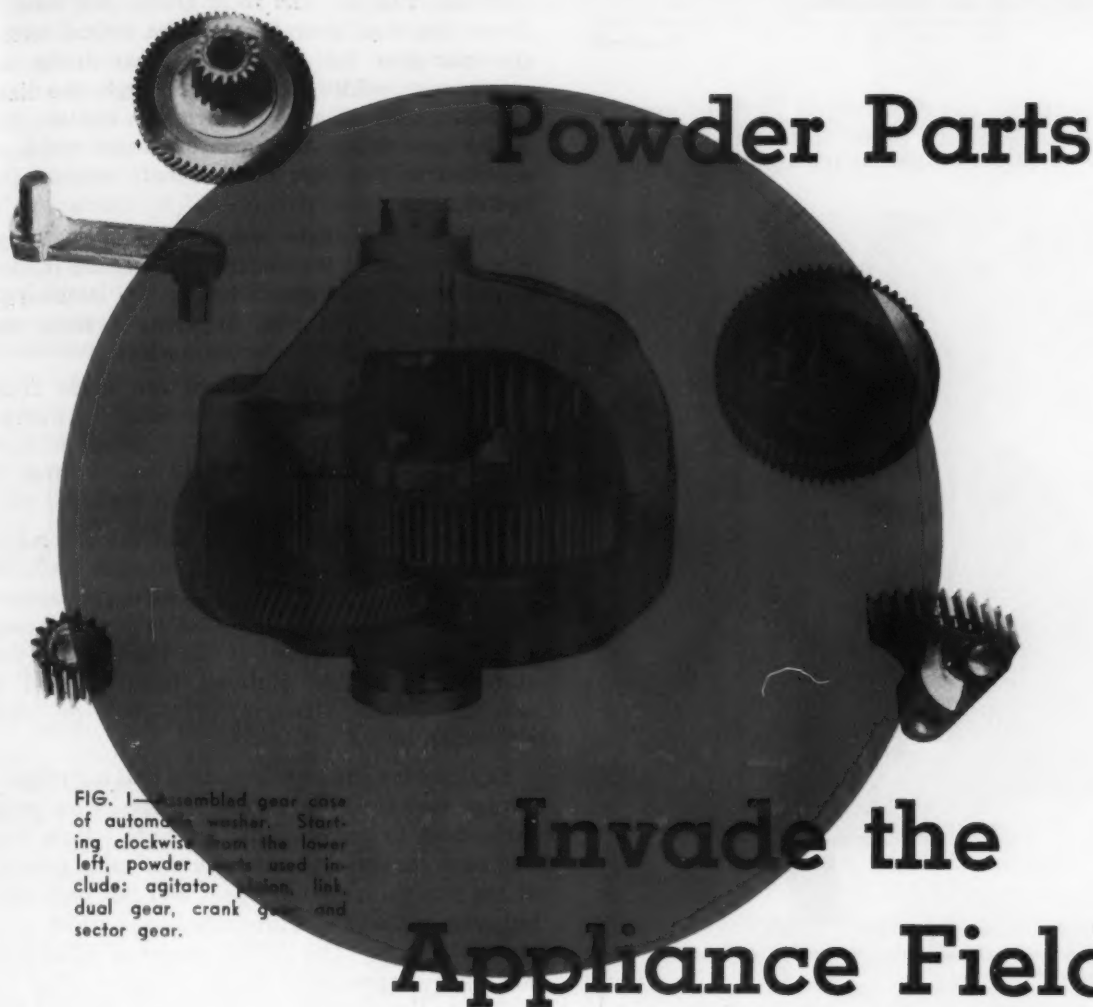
Assembled gear case of automatic washer. Starting clockwise from the lower left, powder parts used include: agitator, pinion, link, dual gear, crank gear and sector gear.
